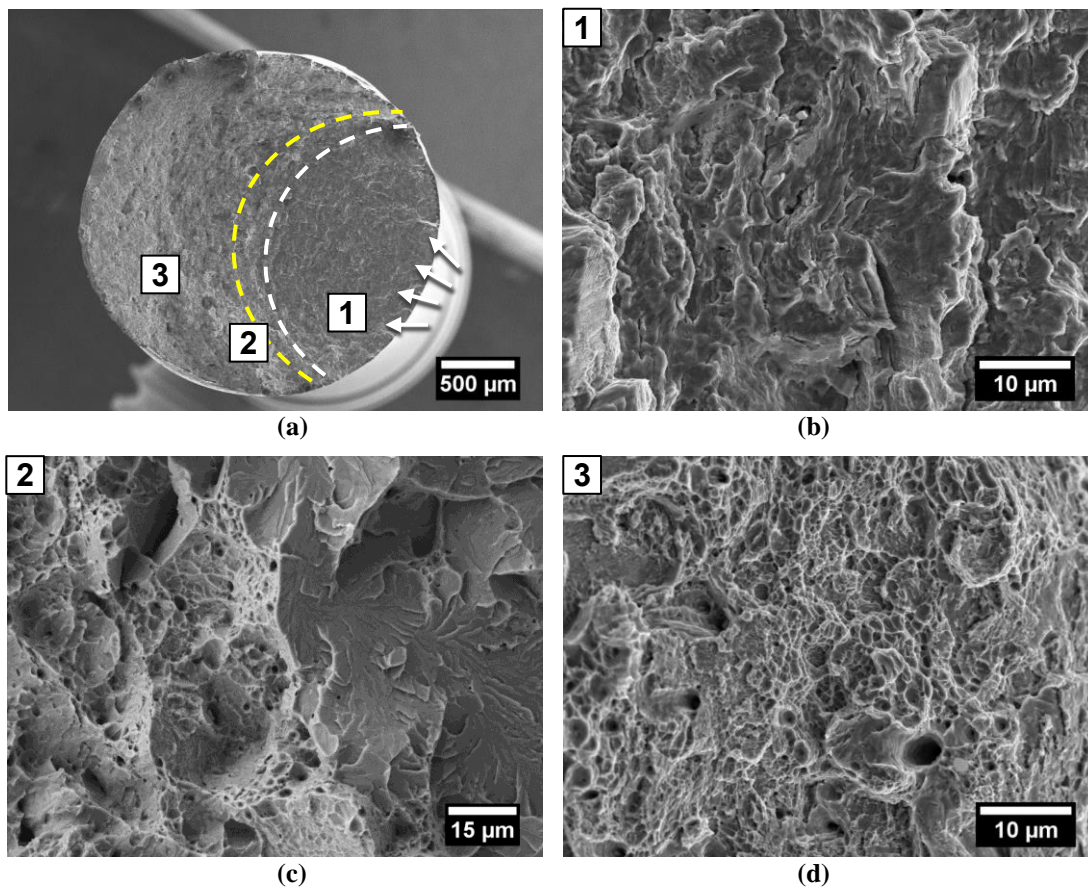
Fractographic analysis of the fractured surfaces in fine pearlite specimens at $\Delta\epsilon_f=0.8\%$, with a brittle transition zone (in yellow) and a final ductile fracture
